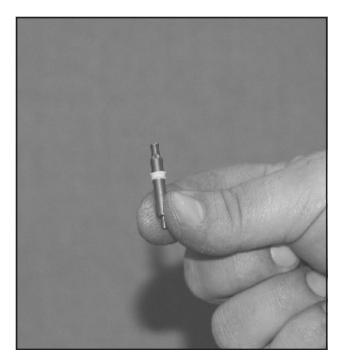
Carefully slide Glyd. Ring over Pin.
